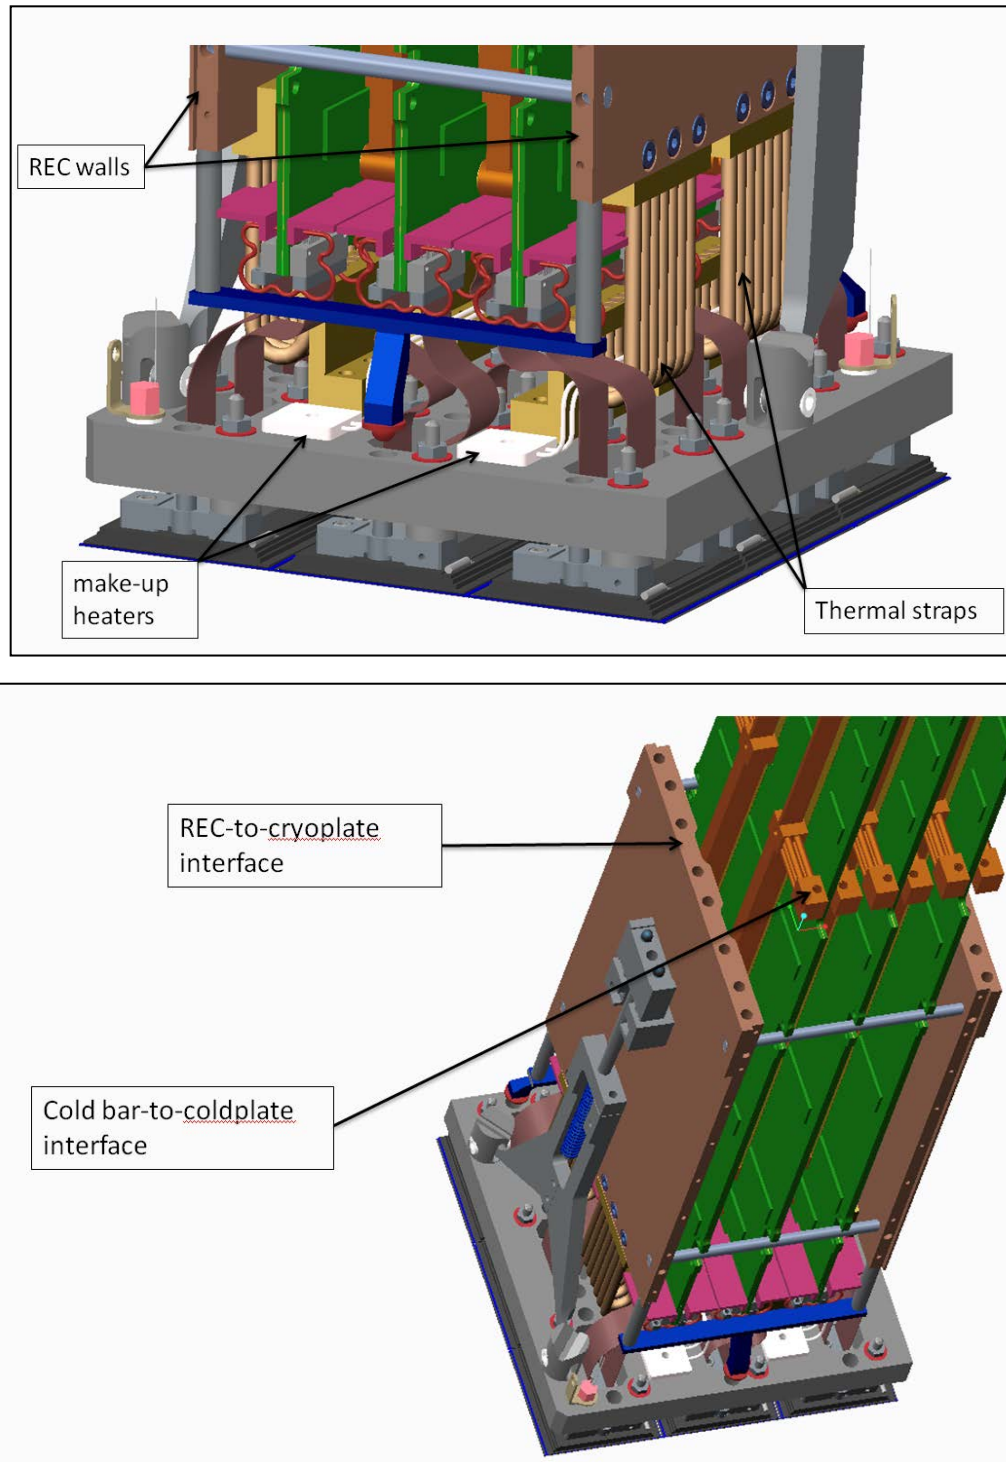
Thermo-mechanical mounting details for RSA and RTM
